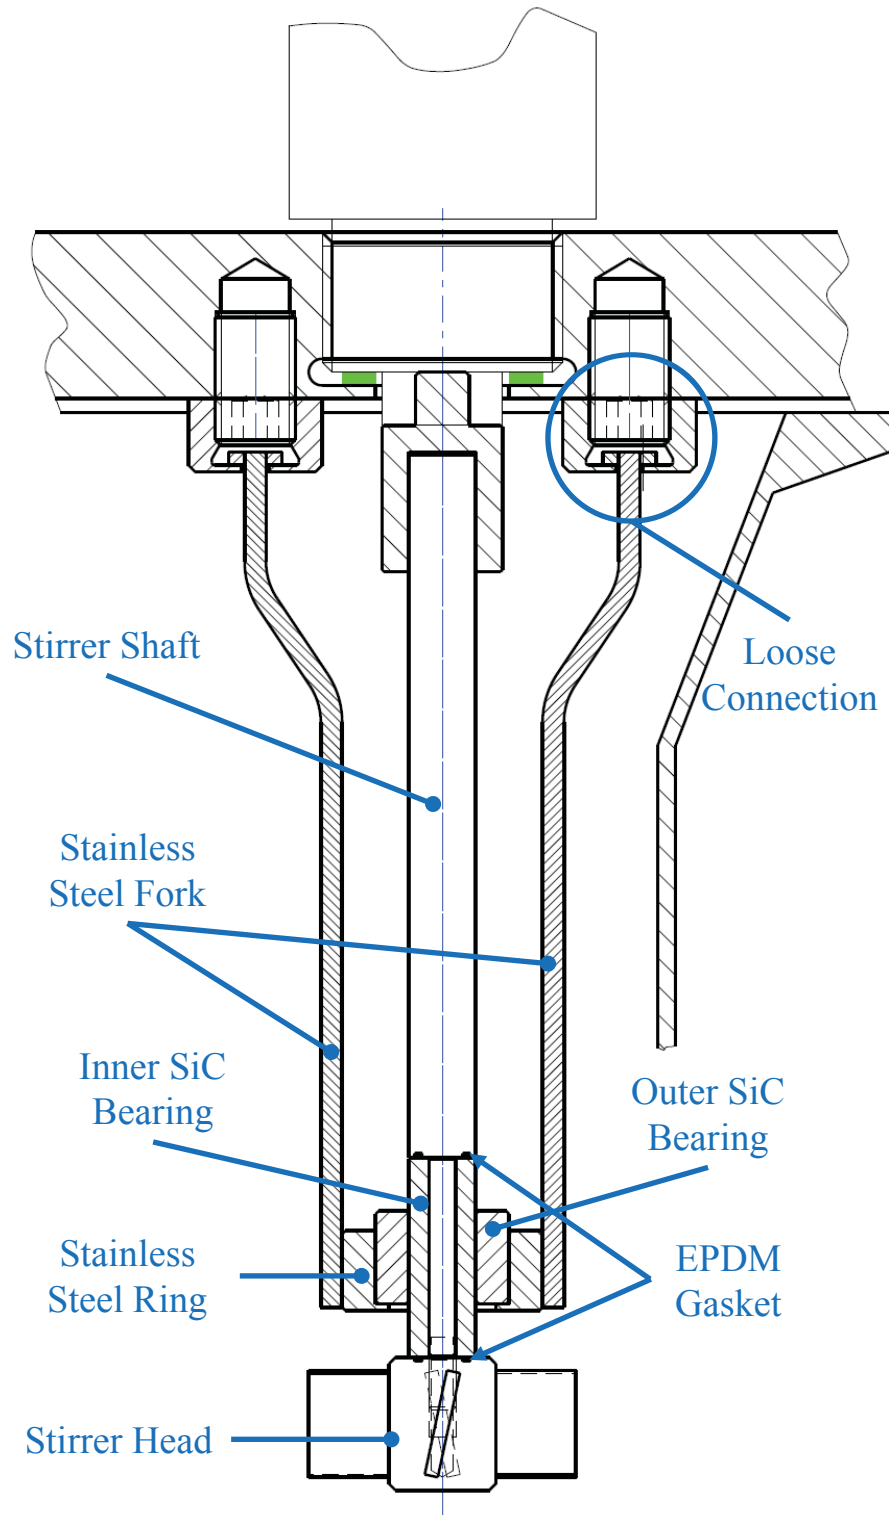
Detailed view of the simulated SiC sliding bearing. The inner part of the bearing (rotor) is fixed to the stirrer shaft by the stirrer head and the gaps are sealed with EPDM gaskets. The outer part of the bearing (stator) is embedded inside a stainless steel ring which is kept in position by a stainless steel fork. The loose connection of the stainless steel fork to the lid provides a certain freedom in movement.
